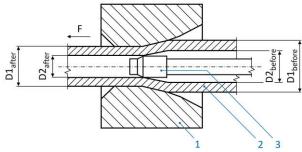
Schematic representation of plug drawing (i.e., cold drawing of a seamless steel tube with a plug): $D1_{before}$ – outer diameter before drawing, $D2_{before}$ – inner diameter before drawing, $D1_{after}$ – outer diameter after drawing, $D2_{after}$ – inner diameter after drawing, F – drawing force, 1 – drawing die, 2 – drawn tube, 3 – shaped (profiled, trapezoidal) plug
